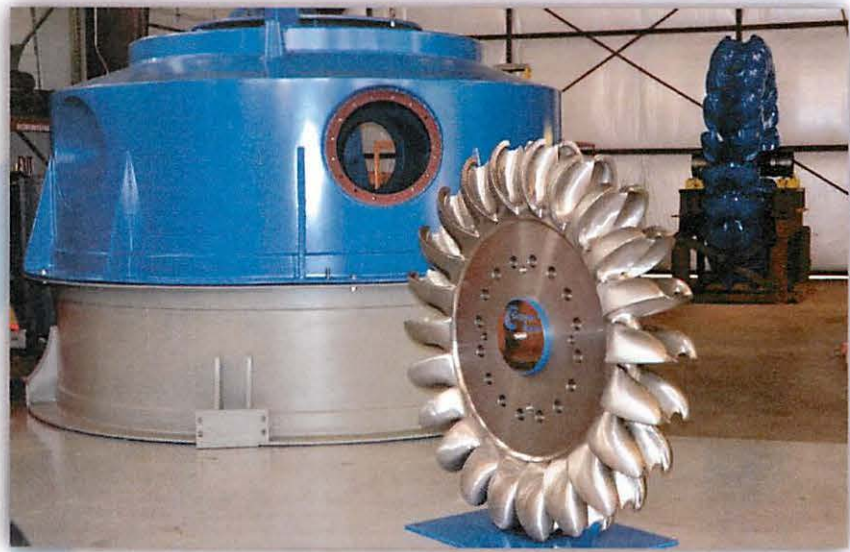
A structural steel housing and two stainless castings fully CNC machined by Canyon Hydro
